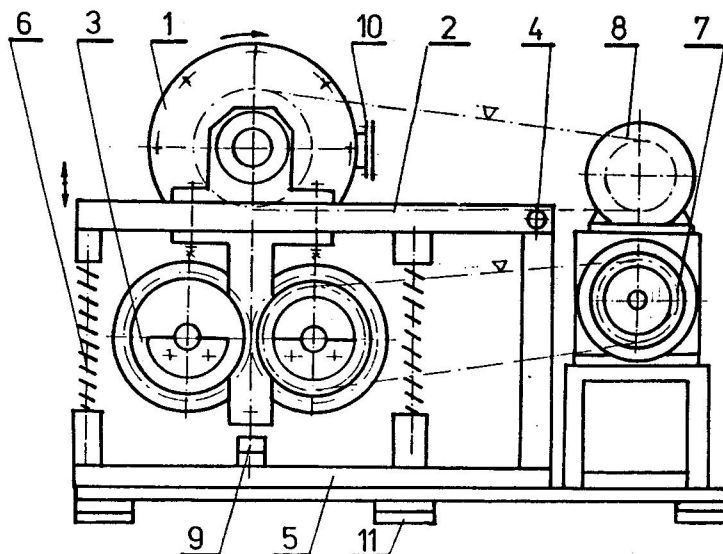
Diagram of construction of the prototype rotary vibration mill of MOW-H-200 type: 1 - unit chamber, 2 - rocker, 3 - vibrator, 4 - articulated joint, 5 - frame, 6 - elastic element, 7 - power unit of the vibrator, 8 - power unit of the chamber, 9 - stop, 10 - closure of chamber, 11 - vibrator insulator [9]
